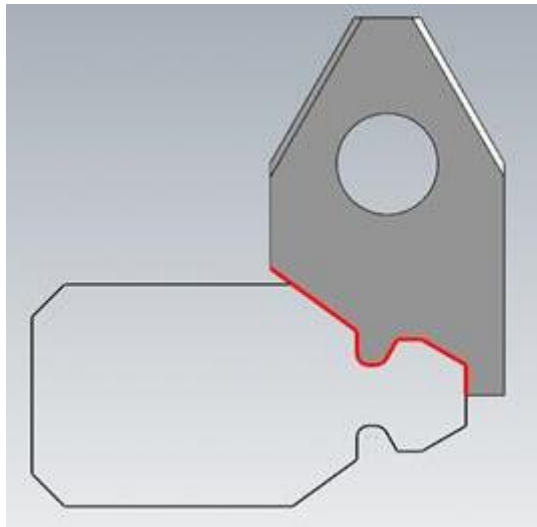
ISCAR’s forming tool concept for cutting the front-end dimensions of the bottom endcap of the nuclear fuel rod.
